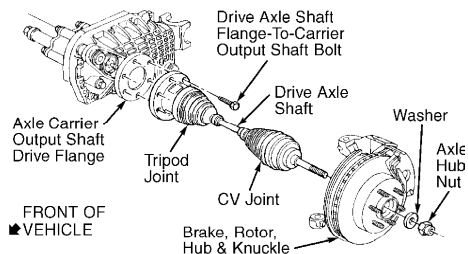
Left Drive Axle Shaft With Tripod & CV Joints
